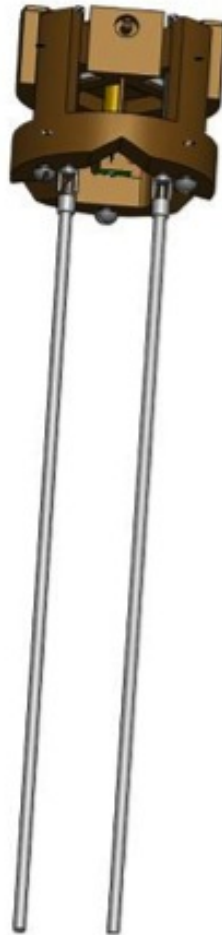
Illustration of the xy coarse positioning mechanism with head assembly. There are two xy feedthroughs with a flat head screw driver at the end that turn the xy positioning screws described in section 3.1. Solidworks File: everything.sldasm
